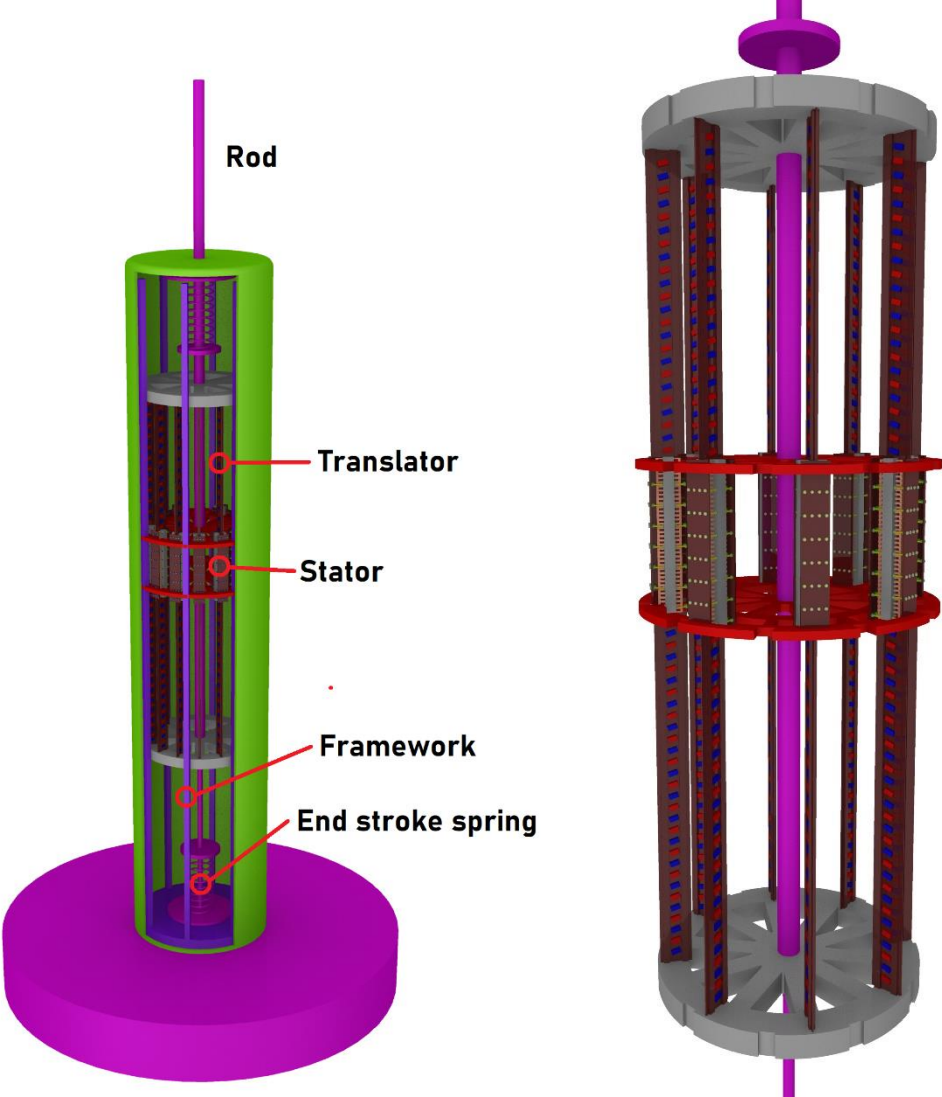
Sectional view of the internal buoy and detail of the movable part
